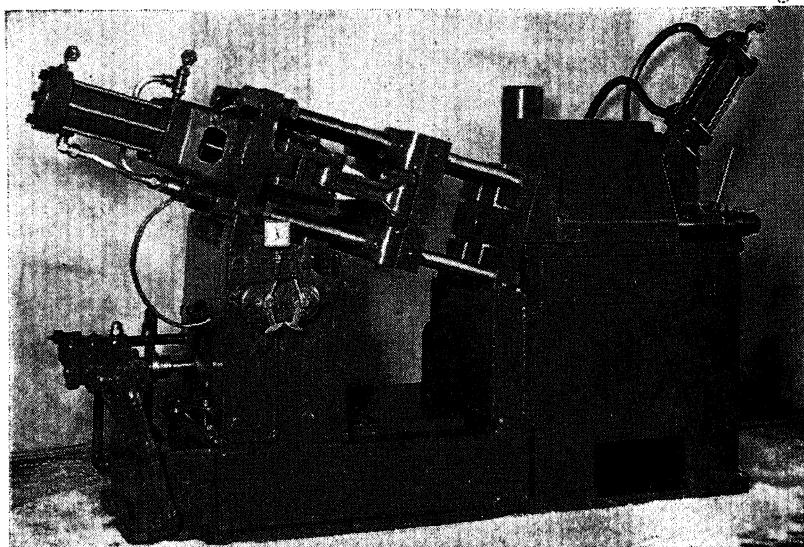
Arc welded steel is employed extensively in the construction of this die casting machine.
